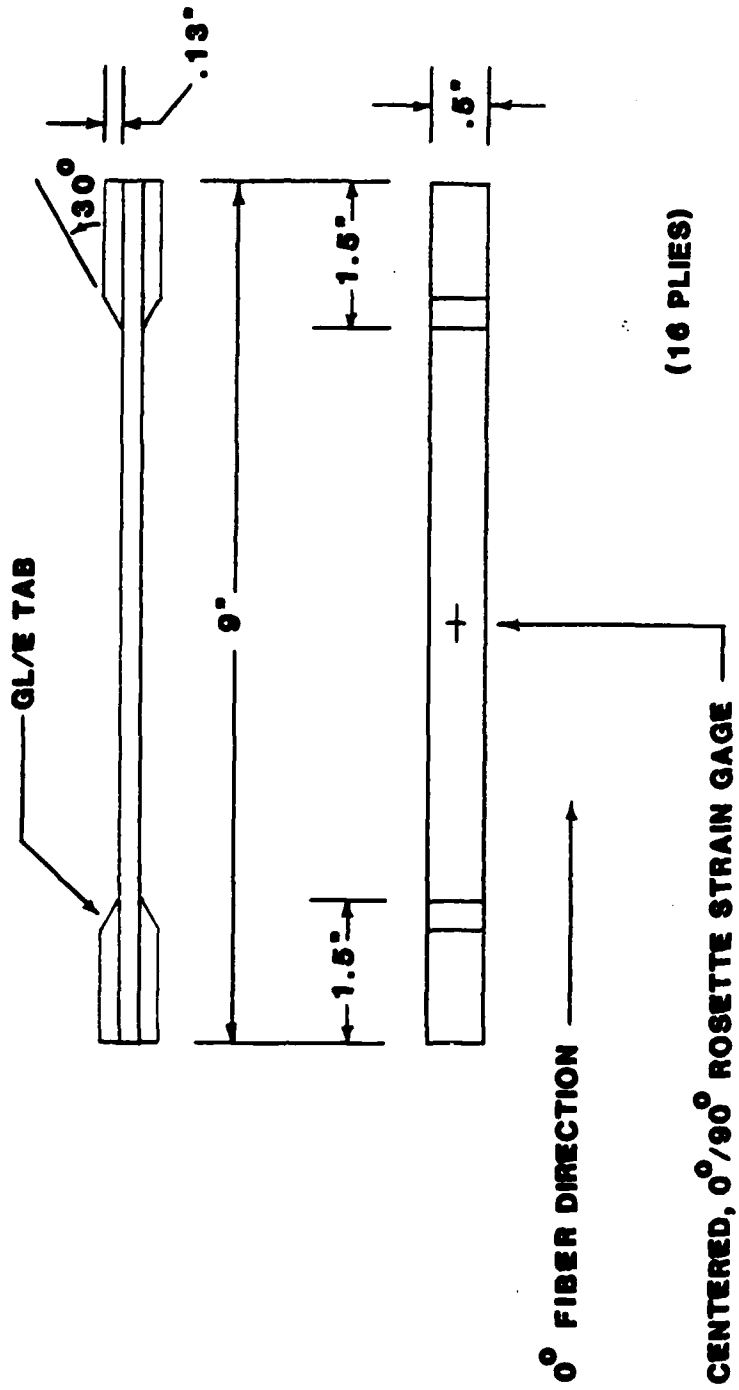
LONGITUDINAL TENSION SPECIMEN.
